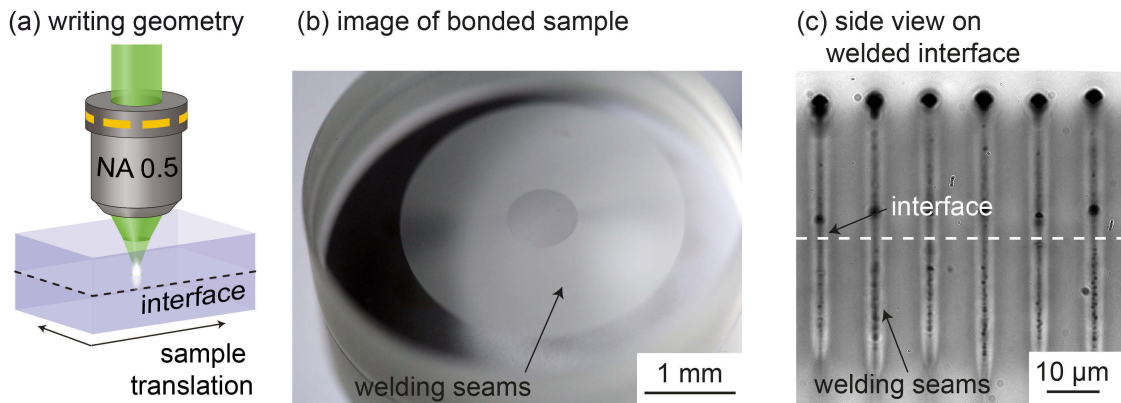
(a) Writing geometry (b) Image of two laser bonded circular blanks of fused silica. (c) Side view on the welding seams located in the interface of two glass samples.
